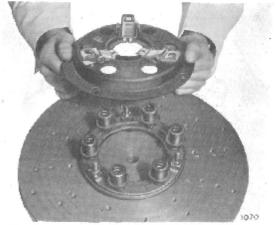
Removing clutch cover assembly (Herald and Spitfire)
